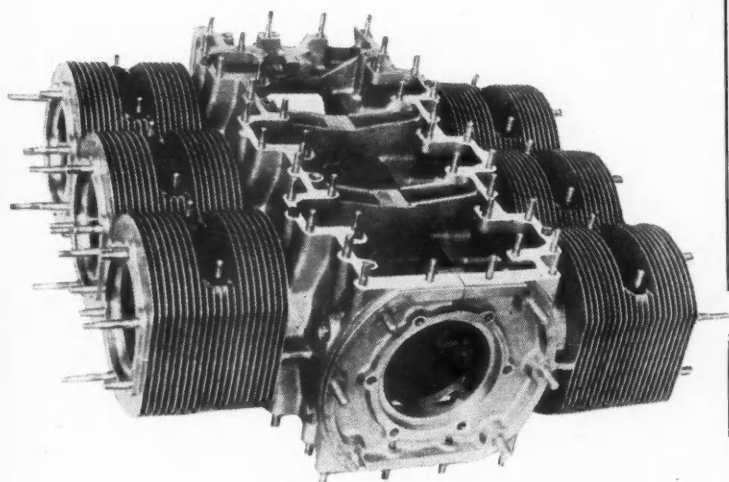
Crankcase studding assembly of the 126 cu in. slide valve engine.
